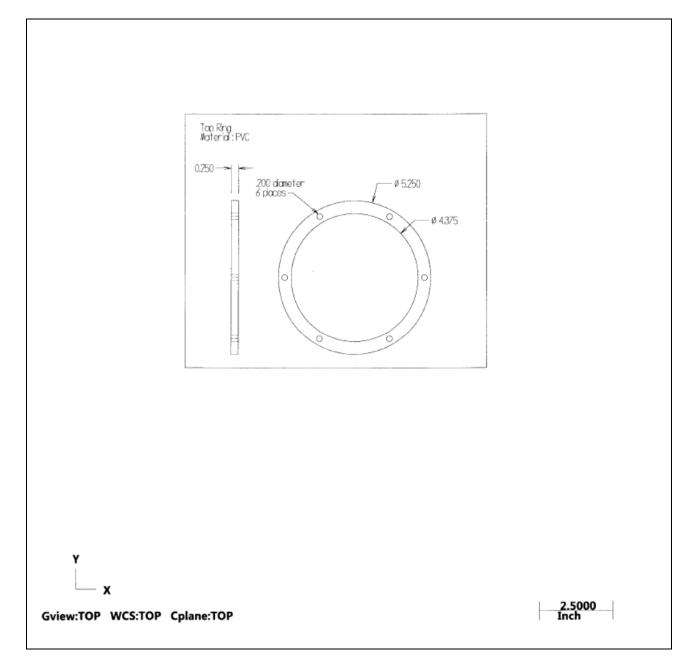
Technical drawing of the top ring of the depth control ring assembly (2 views)
